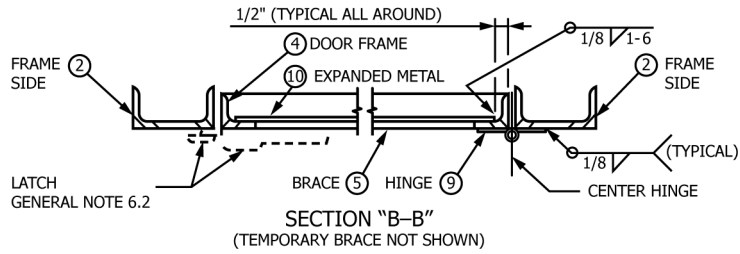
Right-Hand Reverse Door and Frame Assembly—Type III (Left Hand, Type IV Not Shown)
